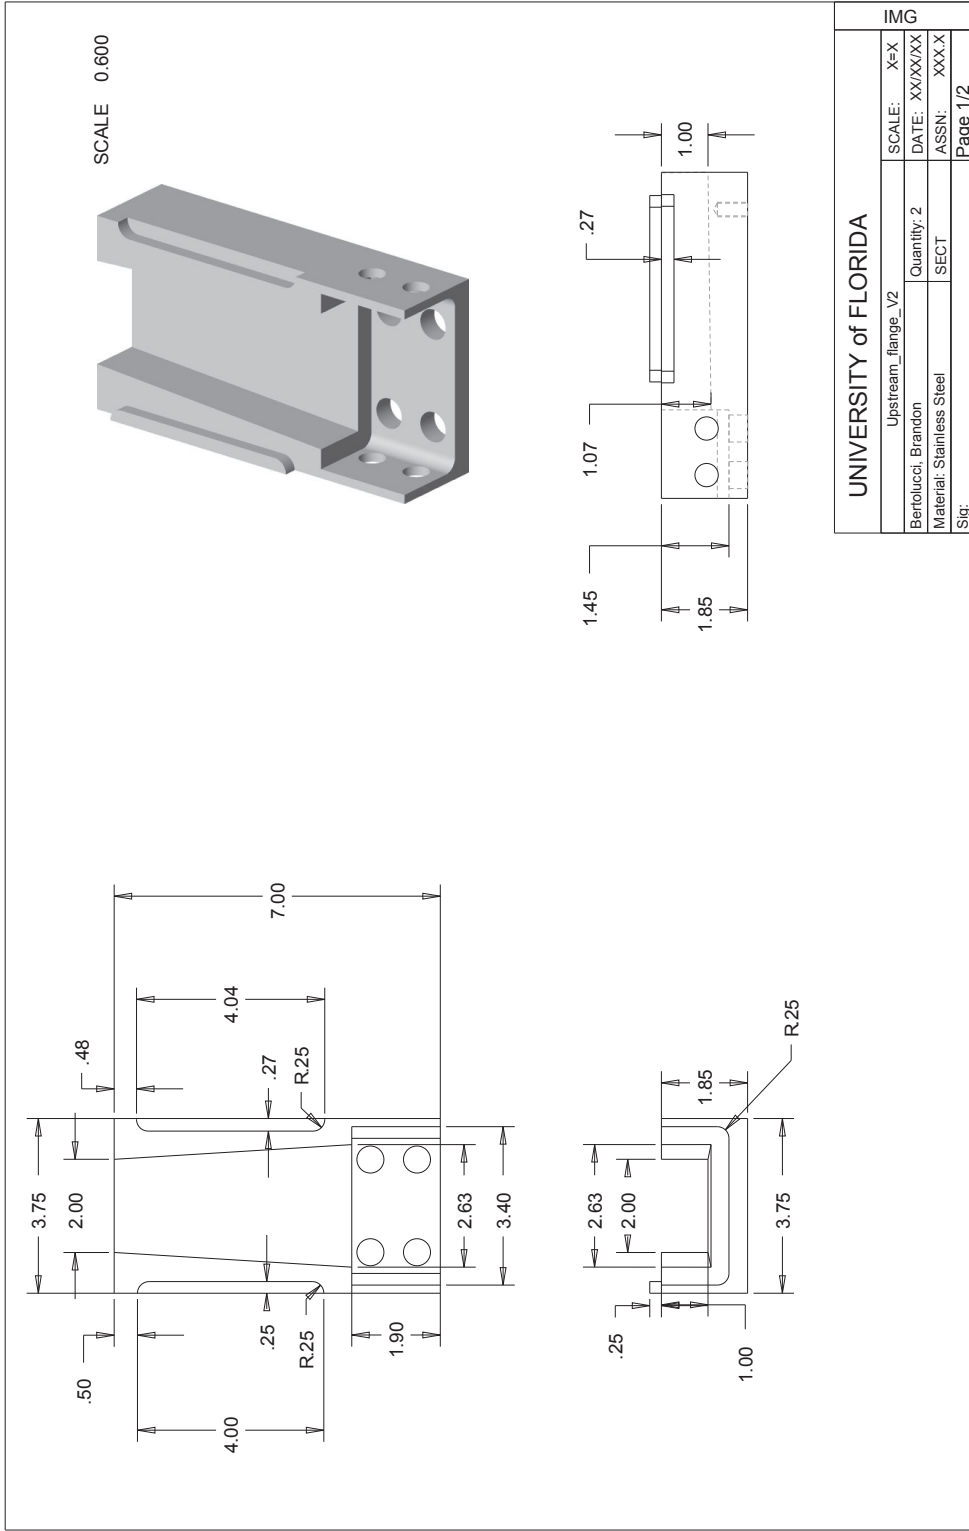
Near-anechoic diffuser upstream flange overall dimensions. The two part is mirrored top to bottom.
